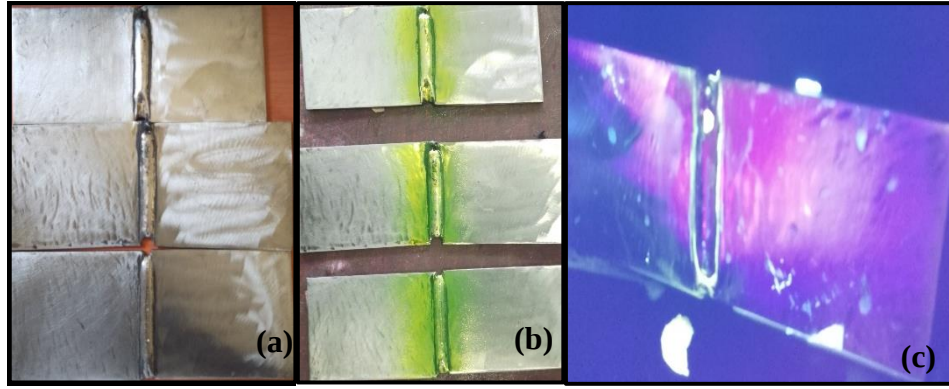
LFT processes: (a) pre-cleaning selected samples no. 3, 7, and 8 by using water and dry it; (b) sprayed samples by penetrant for segregation; (c) application of applying UV light to inspect weld surface.
